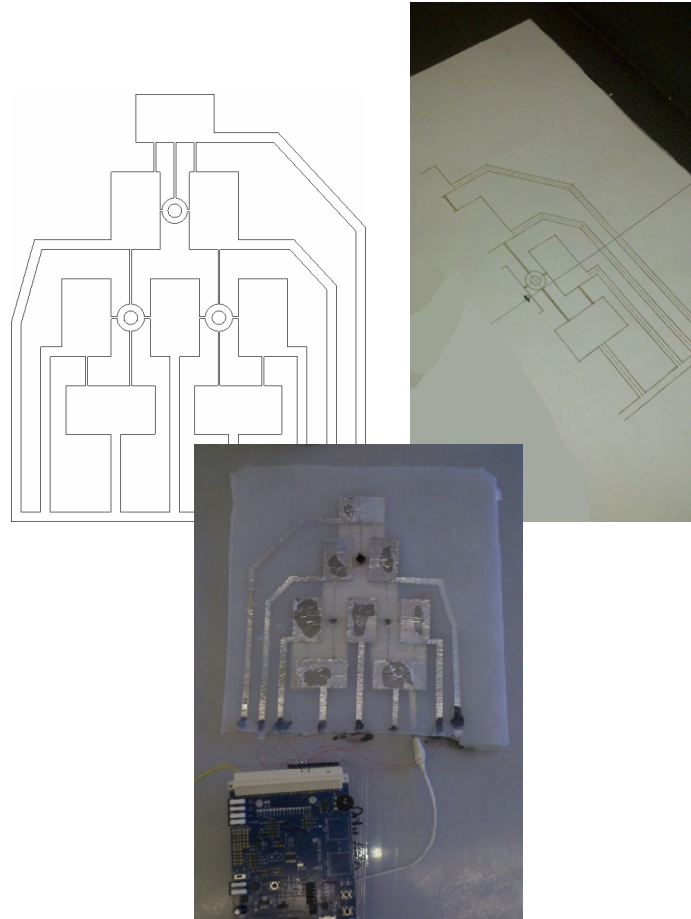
The laser cut sensor process from CAD drawing: to cut, to connection to the microcontroller.
